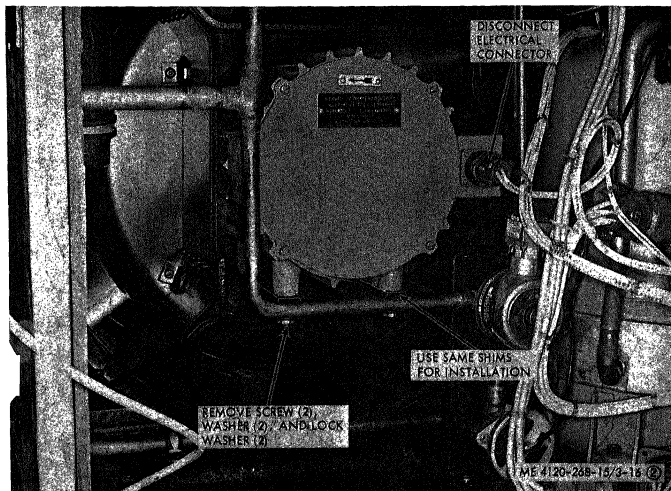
Condenser fan motor, removal and installation (Sheet 2 of 2).
